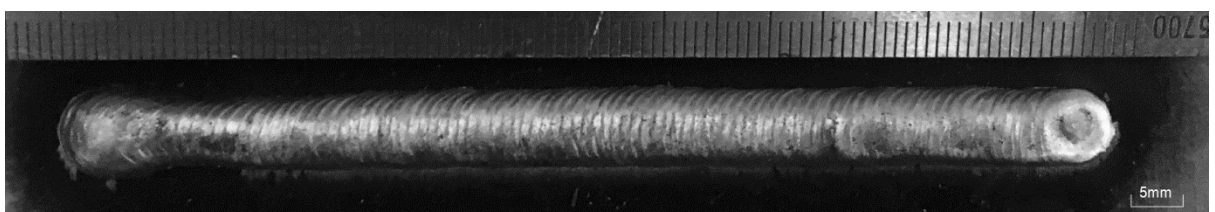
The welding layer with 7.0m/min of feeding wire speed
